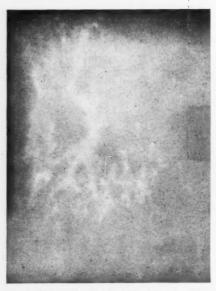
Exograph showing defect in pipe. This is the exograph that was shown in process of being taken in Fig. 3.
